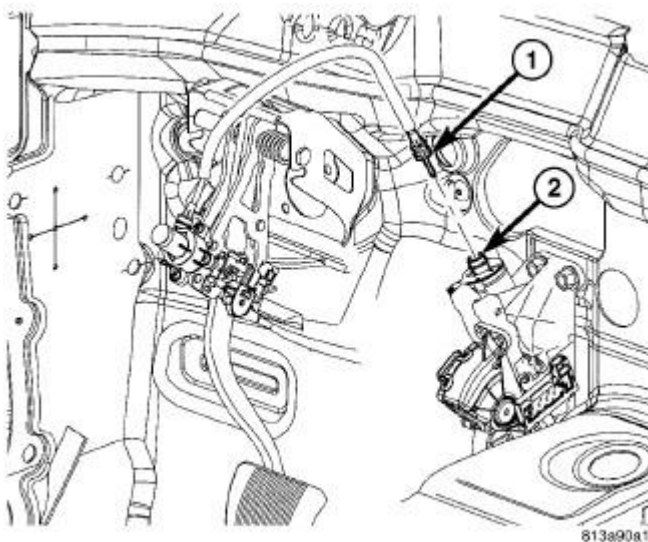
Adjuster Cable And Accelerator Adjuster Motor
